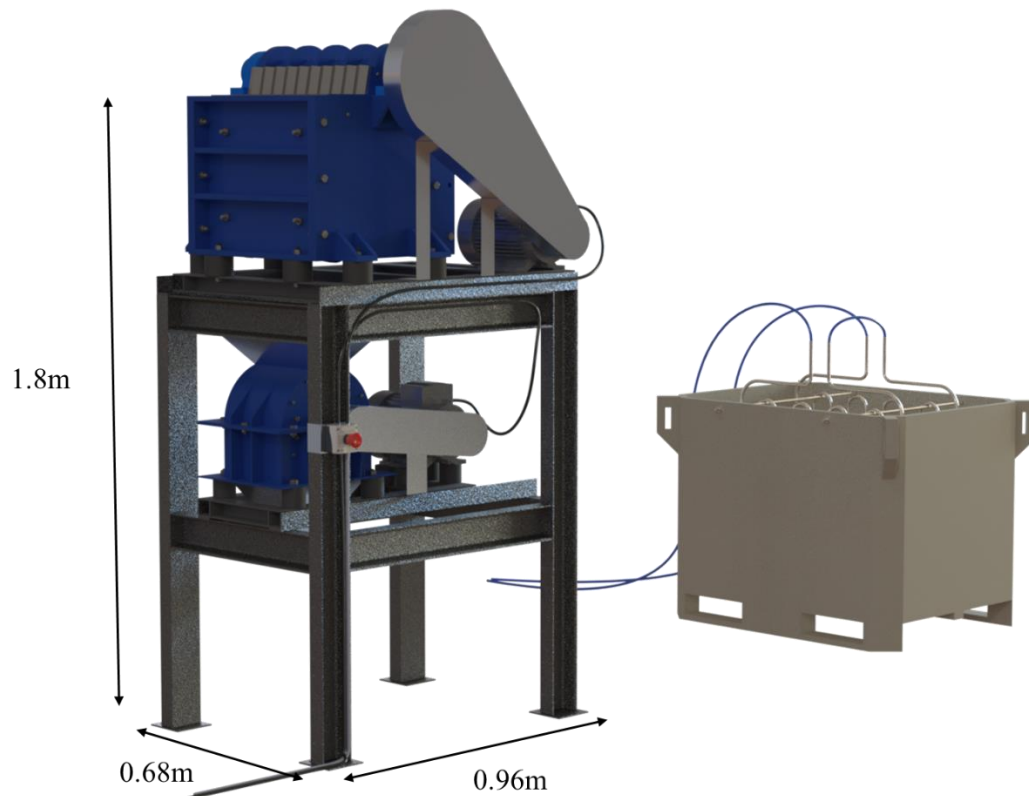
Figure Showing the Jaw Crusher, Hammer Mill Crusher, Crushers Support, and the Sand Dryer
